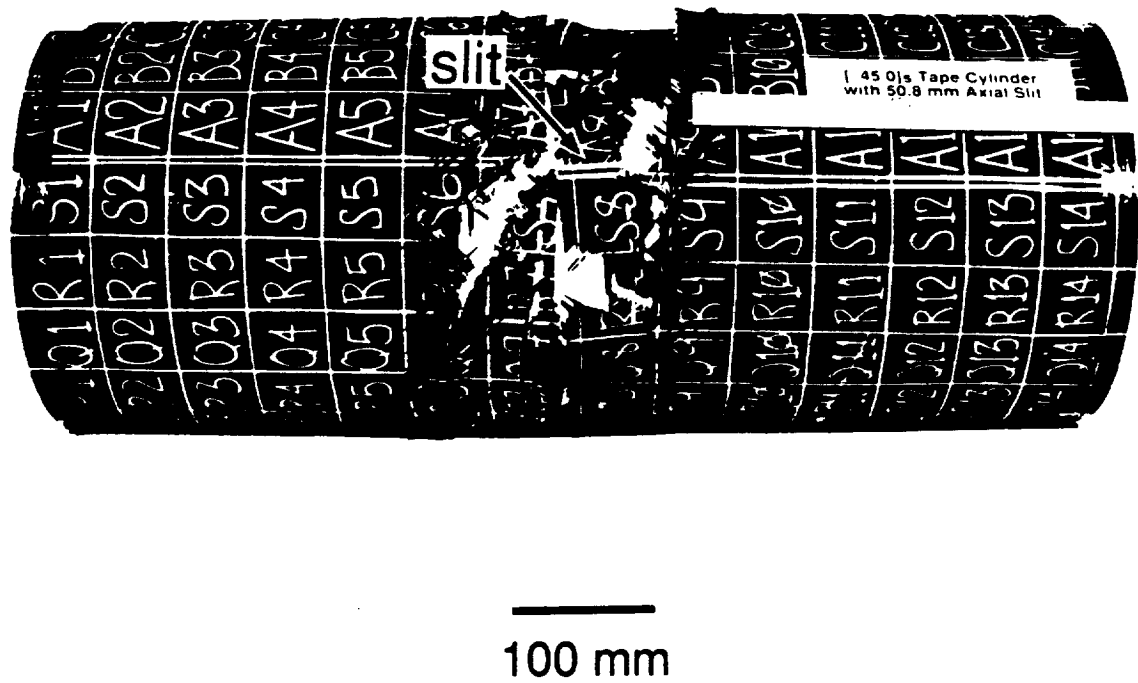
Post-test photograph of uniaxially loaded $[\pm 45/0]_s$ cylinder with 50.8 mm slit.
